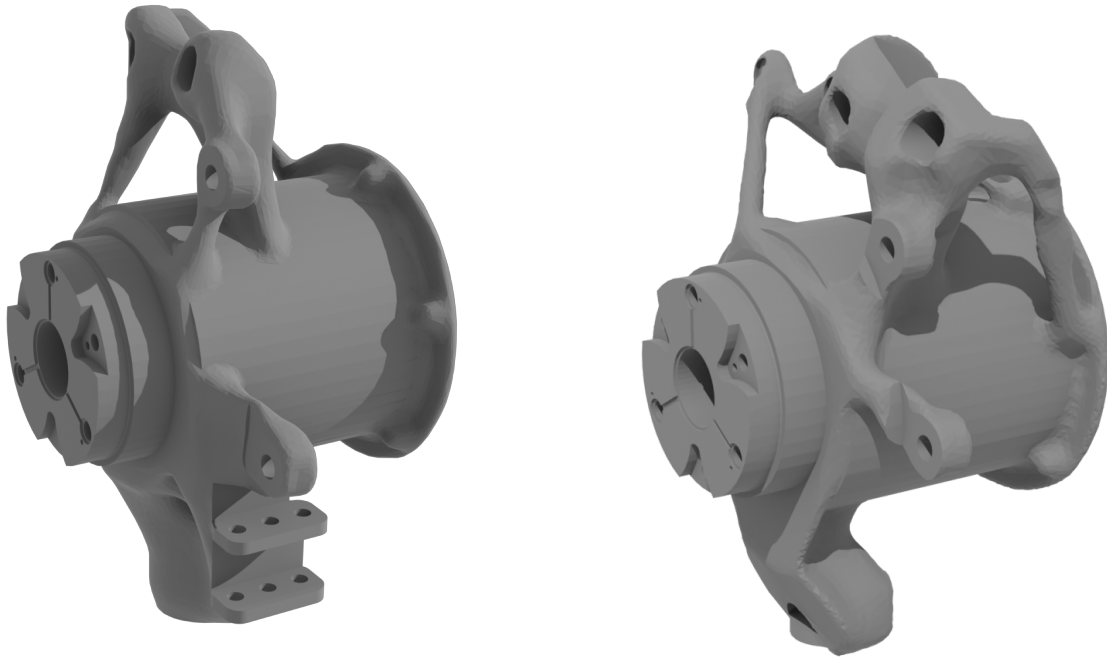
Final concept of the front upright (left) and rear upright (right) integrated with cooling jacket and inner planet carrier.
